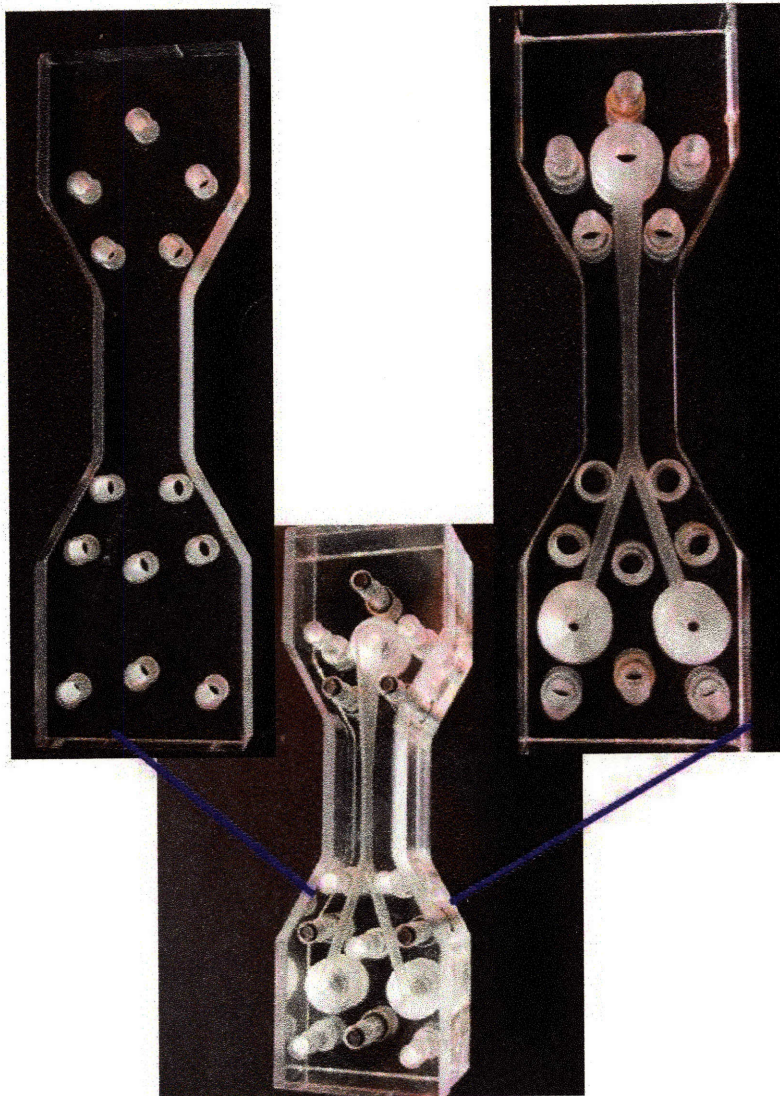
Channels of submillimeter dimension machined in plastic (PMMA) and capped with the same to realize plastic devices.
